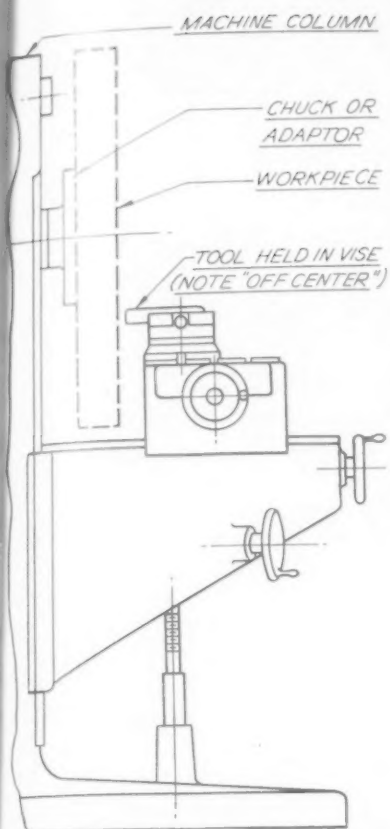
Turning a wheel on a milling machine. Workpiece is swung between column and saddle. The tool is clamped in a vise, secured to the table.
